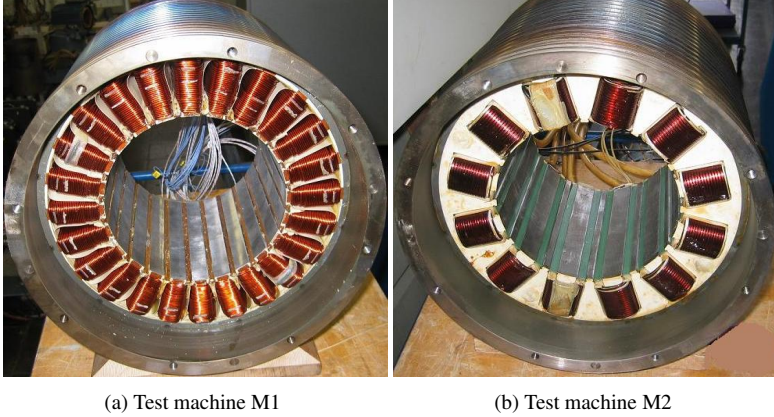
Stators of the two test machines M1, M2 with fractional-slot tooth-coil winding with $q = 1/2$ slots per pole and phase: a) machine M1 with double-layer winding, b) machine M2 with single-layer winding [11], [12]
